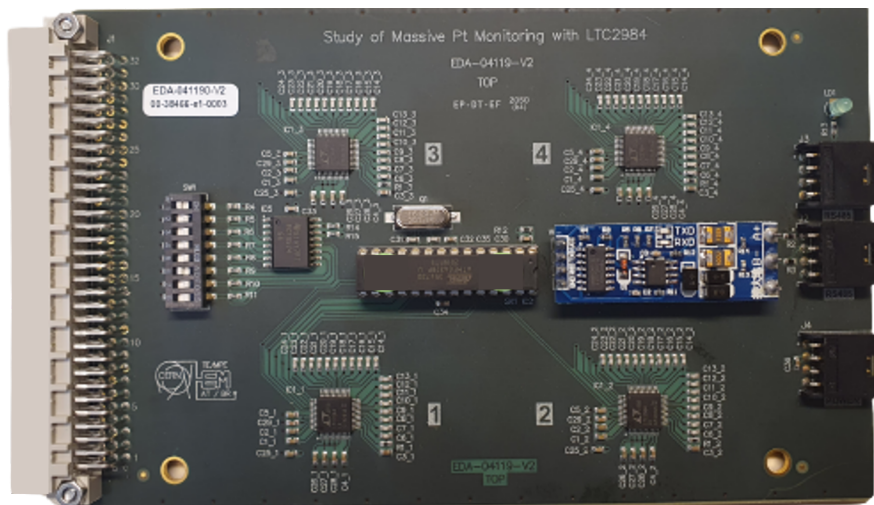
A photograph of the fabricated PCB prototype to readout up to 24 temperature sensors.
